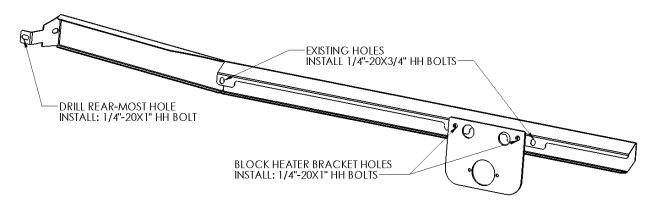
DRIVER CAB PANEL, SHOWN FROM BACK
